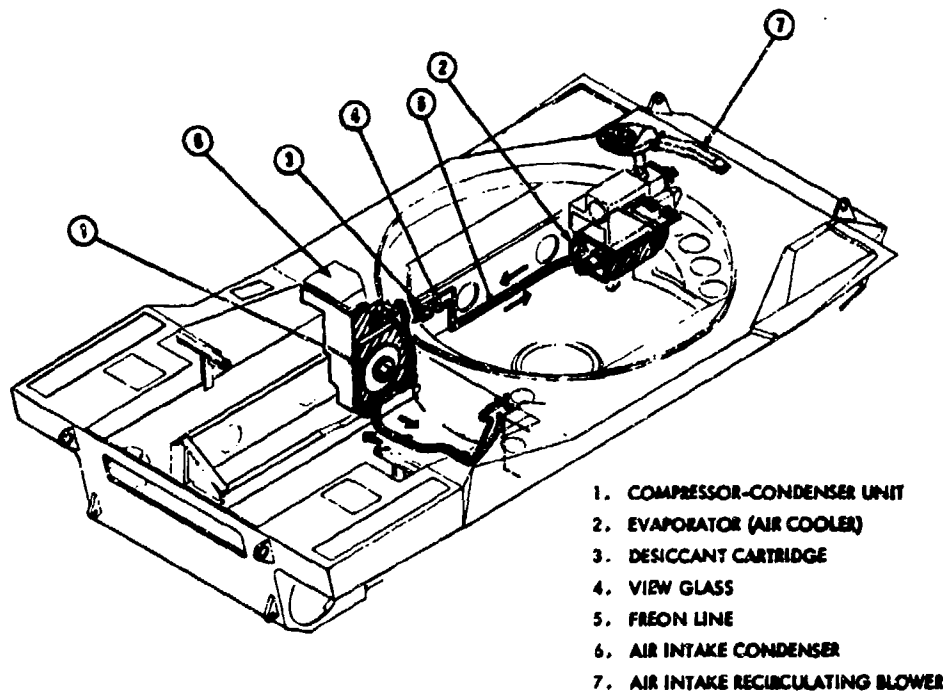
MBT70 Prototype Tank Environmental Control Unit (Ref. 18)
